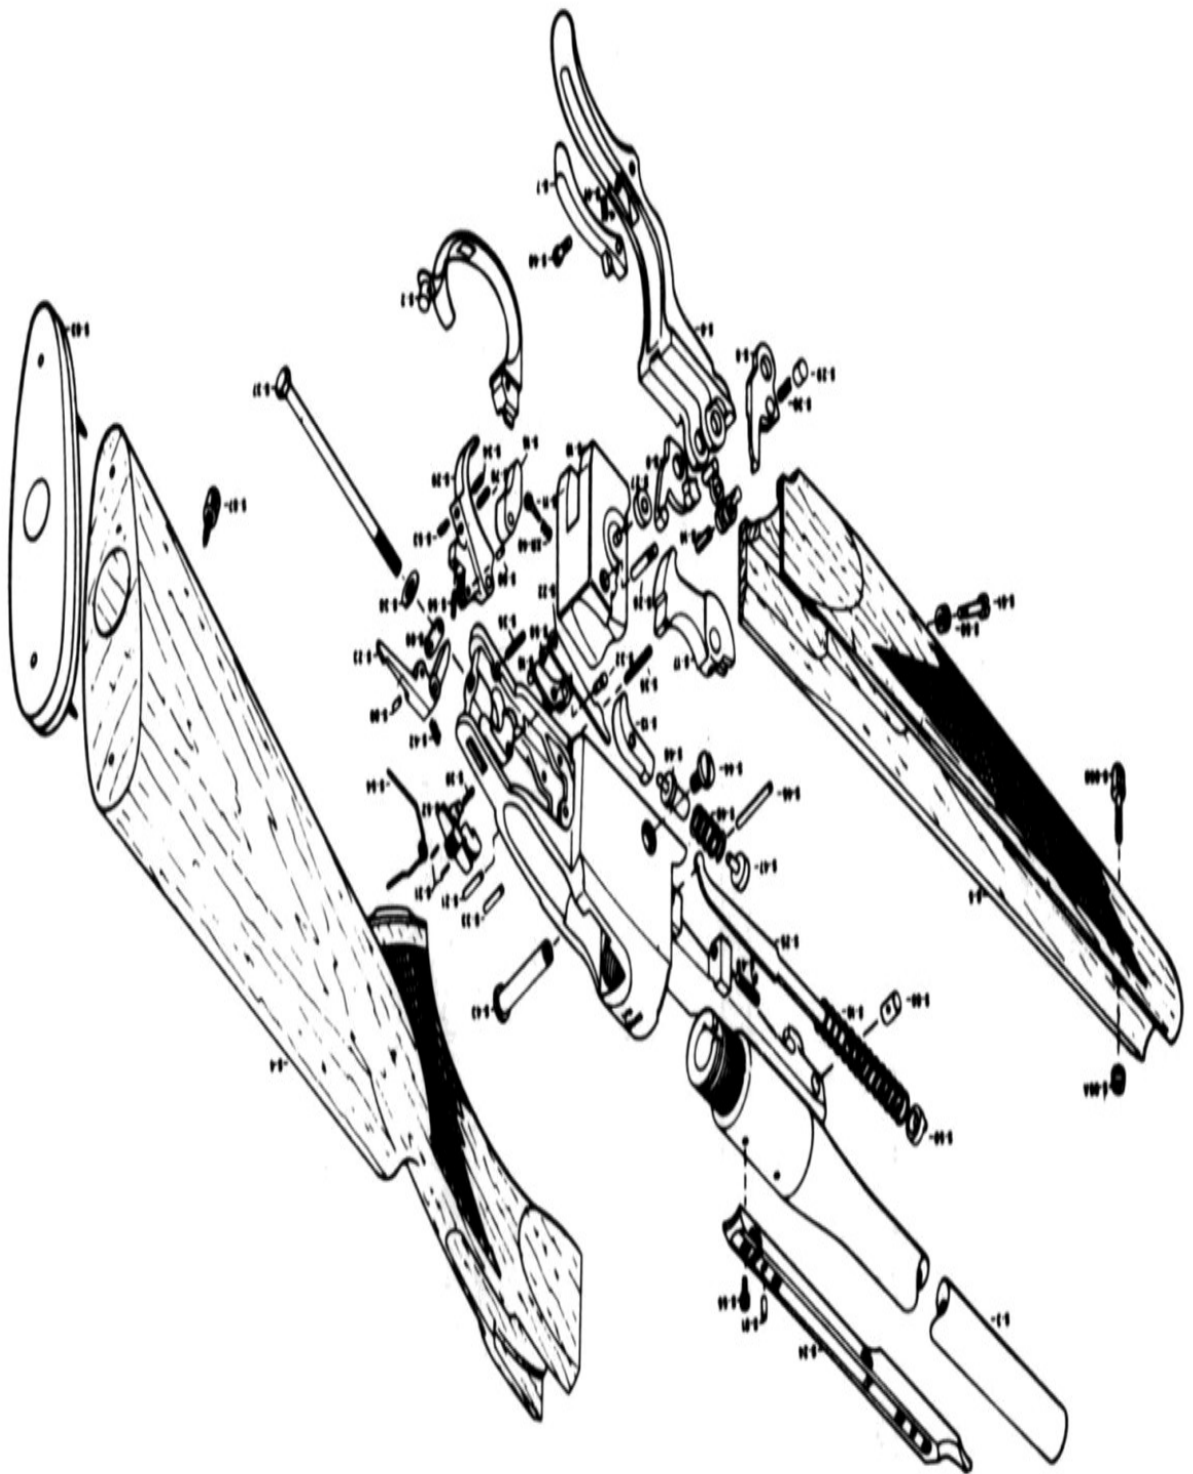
Exploded view of Ruger No. 1 single-shot rifle. Such views are extremely useful to the gunsmith to see the relation of the various parts to each other.
